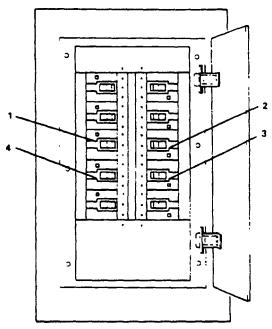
Auxiliary Machinery Space No. 1 Power Panel No. 4.
